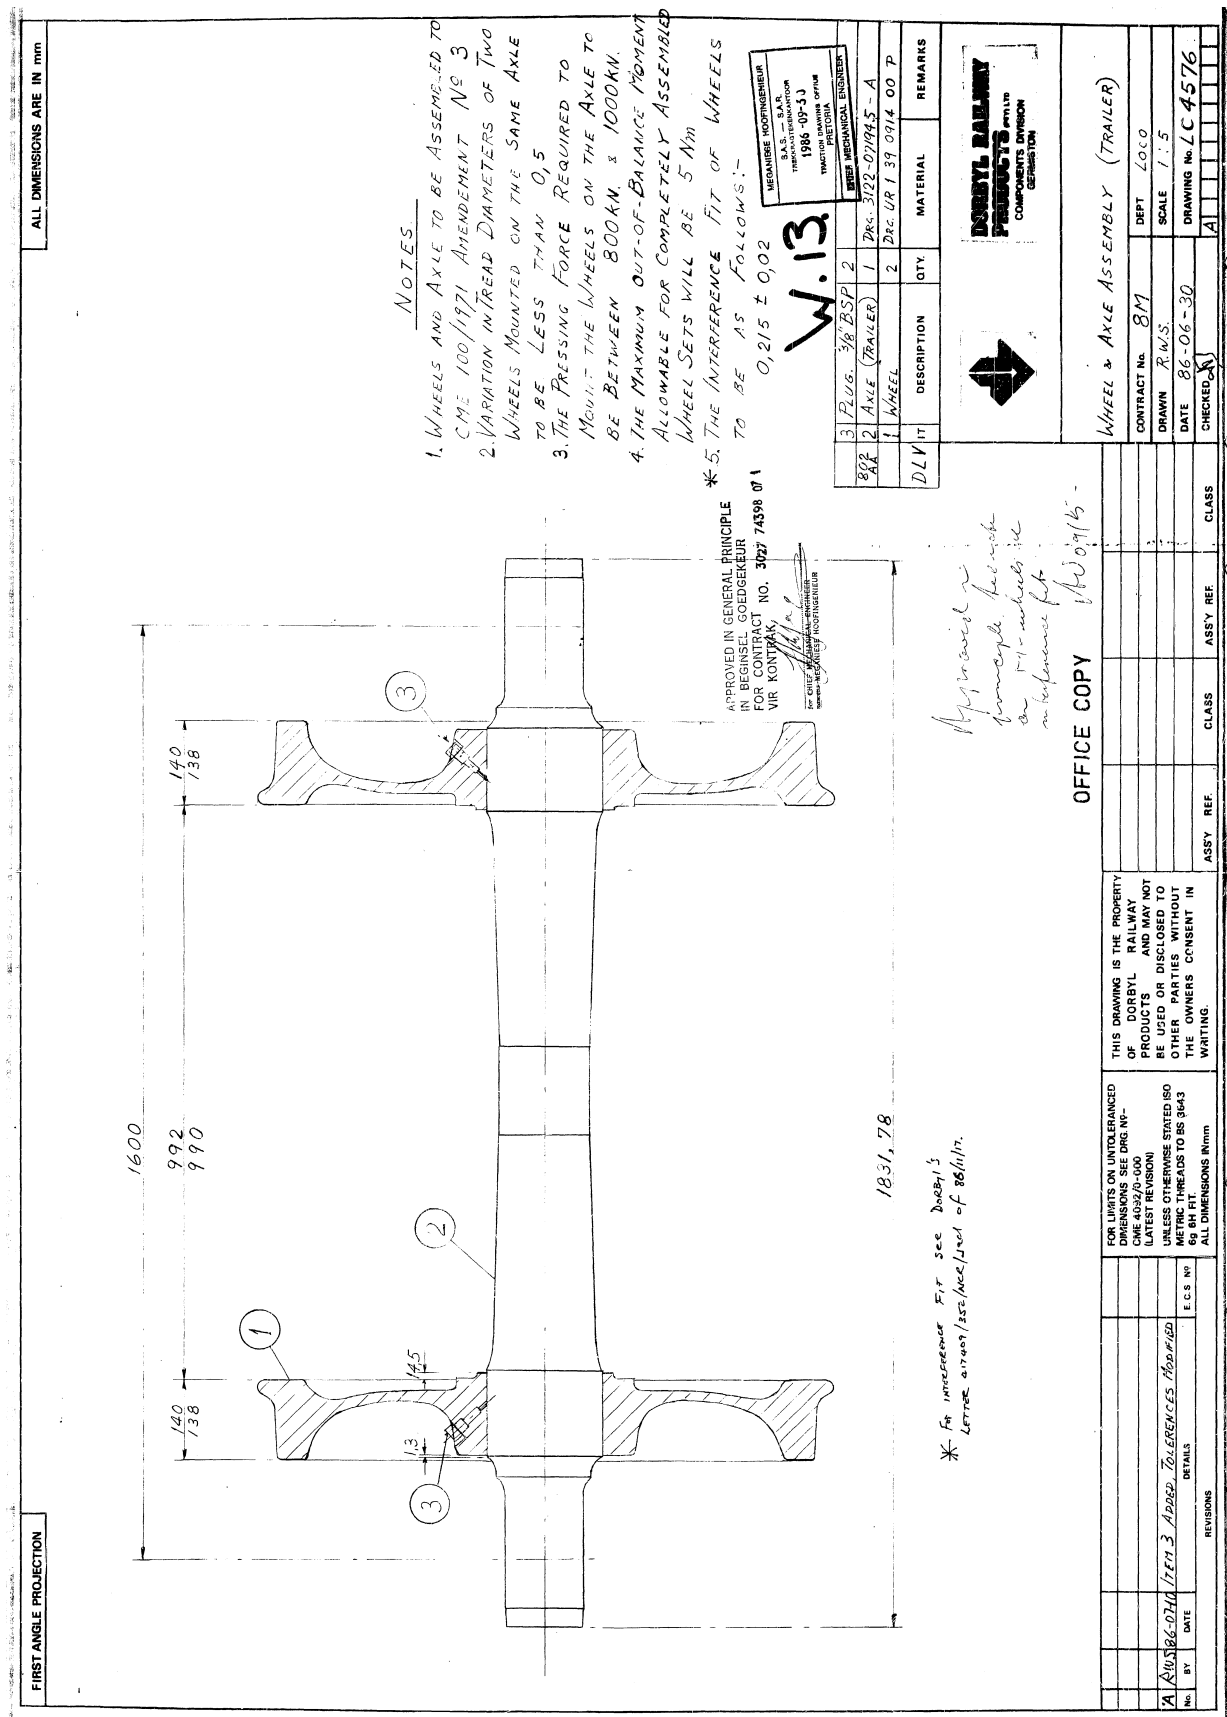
Assembly engineering drawing of a Plain Trailer wheel set
